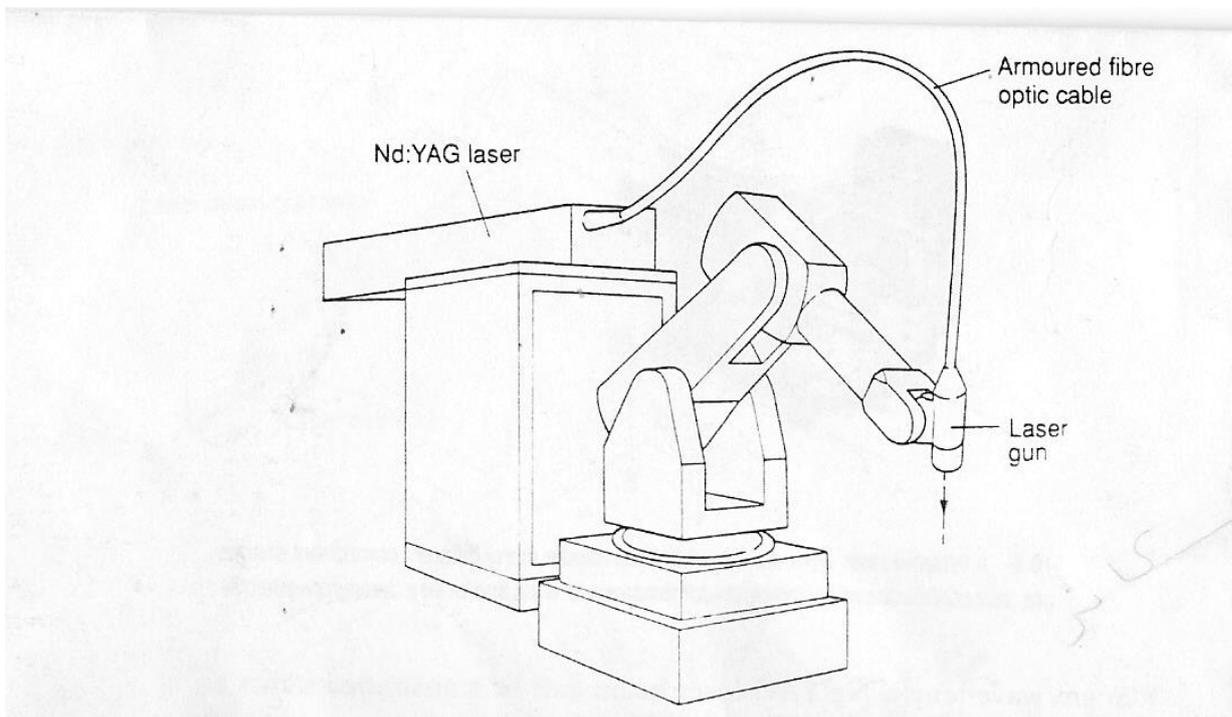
Utilization optical fibre in robotic laser welding system [44]
